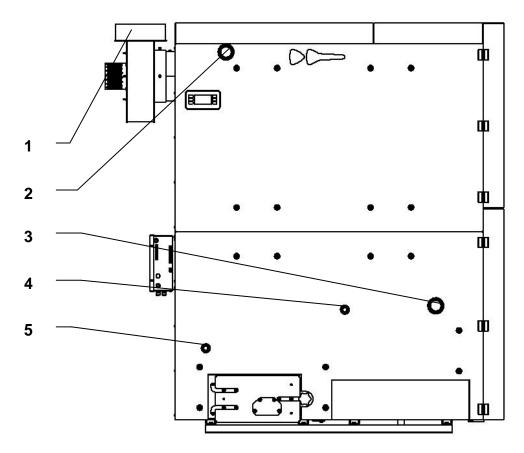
Inlets and outlets of BENEKOV R100 boiler
